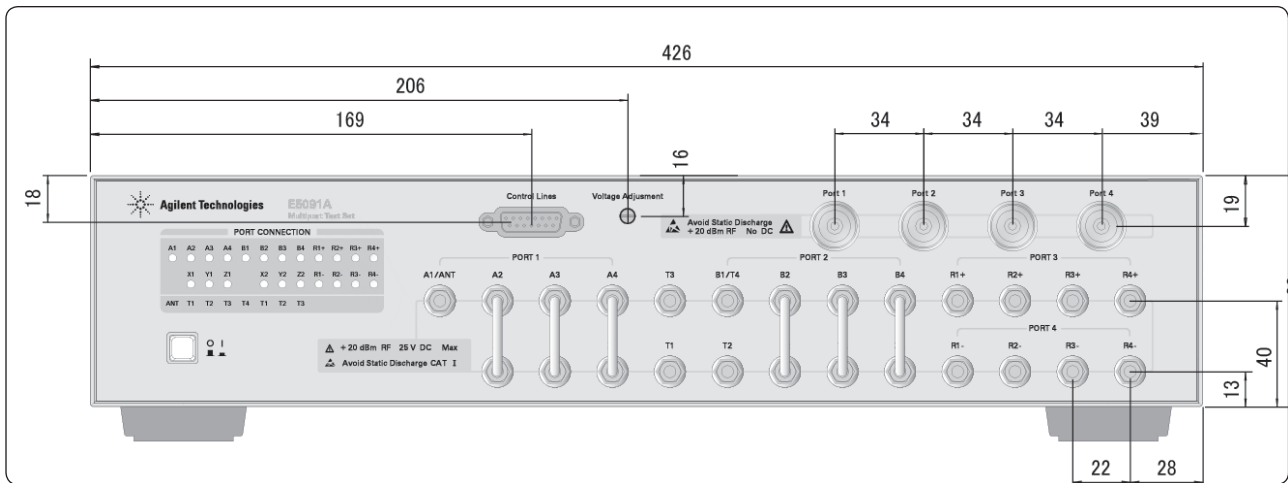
Dimensions (front view, with Option E5091A-016, in millimeters, nominal)
